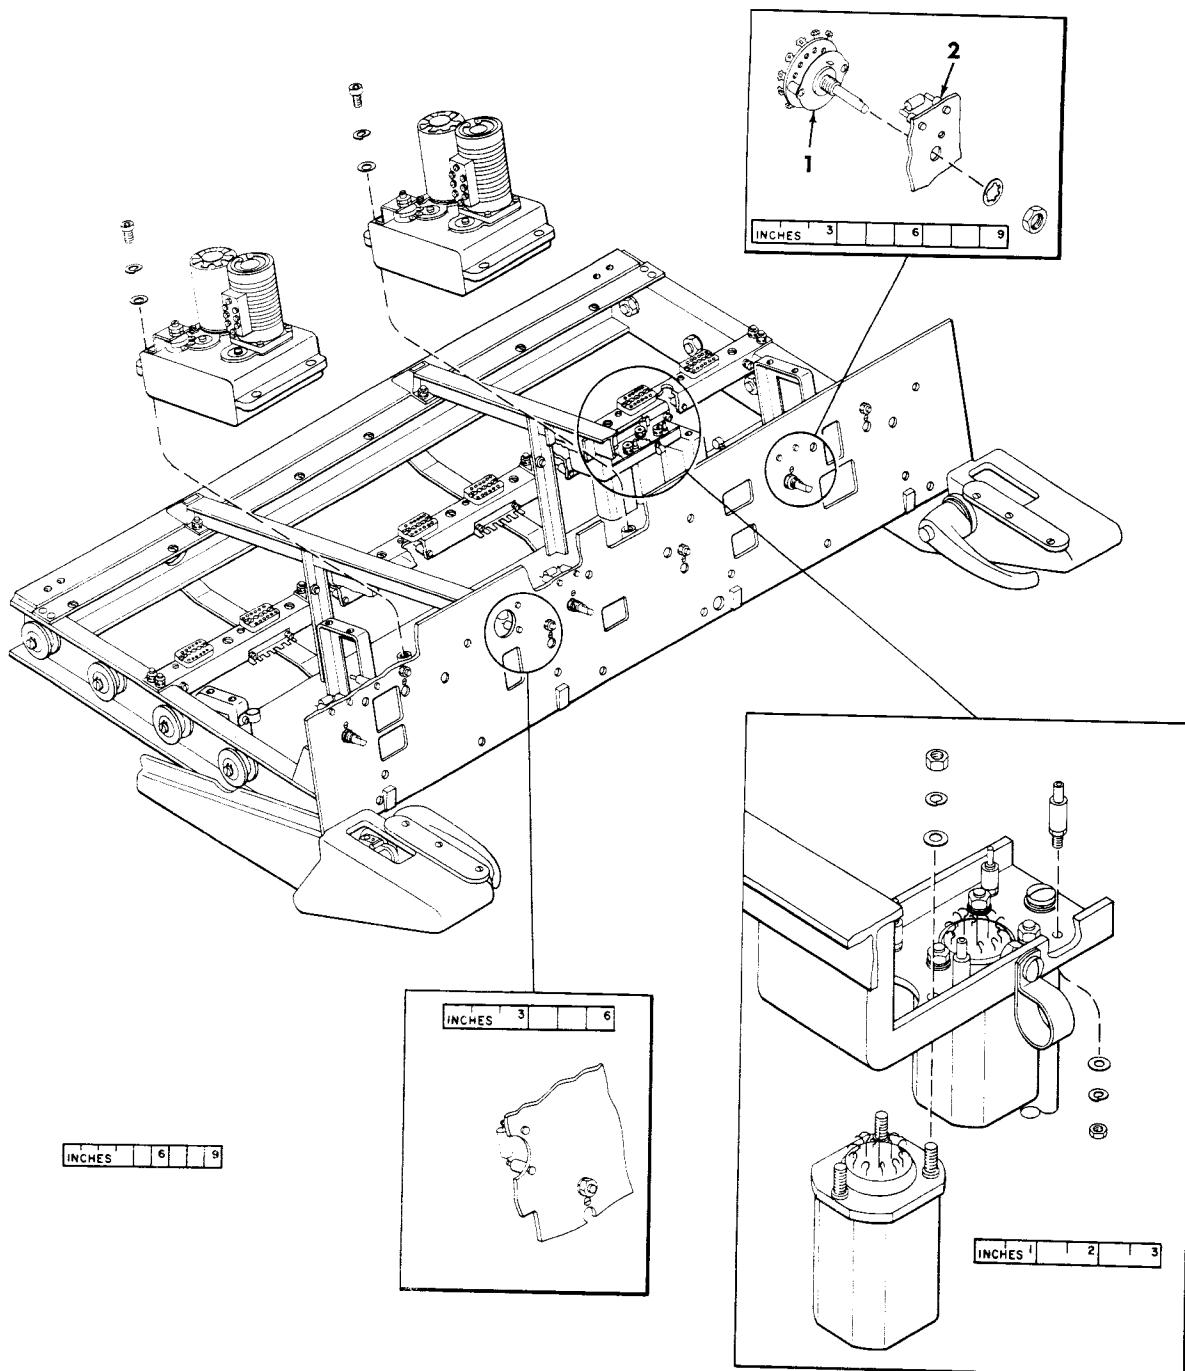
Control drawer, missile track (8511278) – partial exploded view
